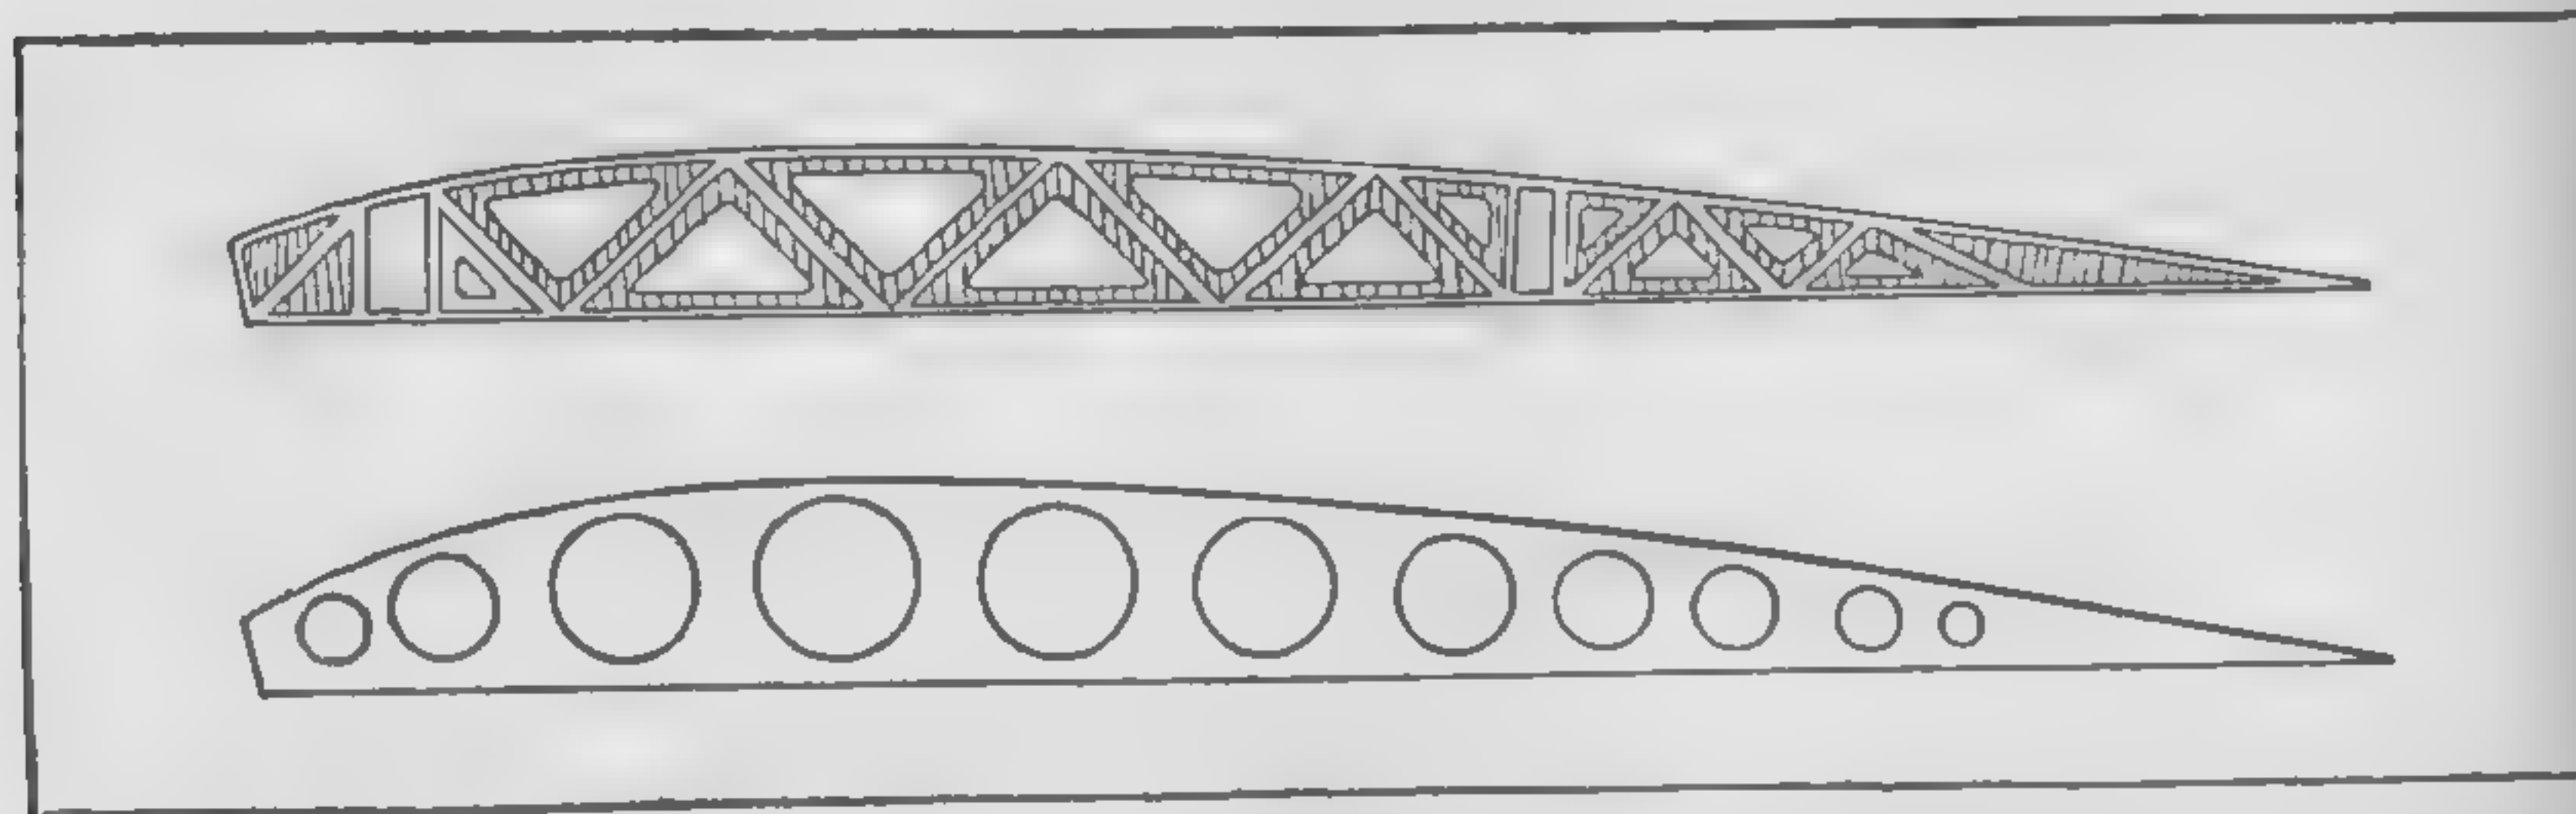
The Rib Shown at the Top Is Made of Corrugated Sheet Aluminum Alloy, Stamped Out. The Rib Shown in the Lower Part Is Made of Plain Sheet Aluminum Alloy, also Stamped Out
